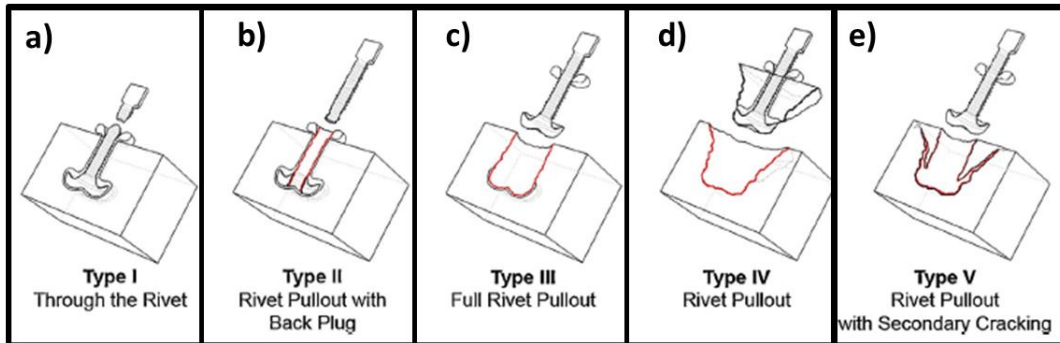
Friction-riveted joints failures under T-pull testing. The thicker red lines indicate the path of crack propagation upon final failure [69].
